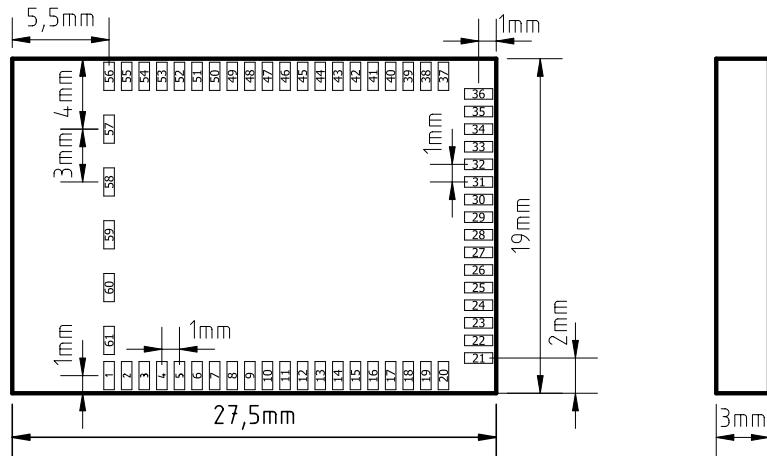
Dimensions and pad layout of the Preon32 (top view)
